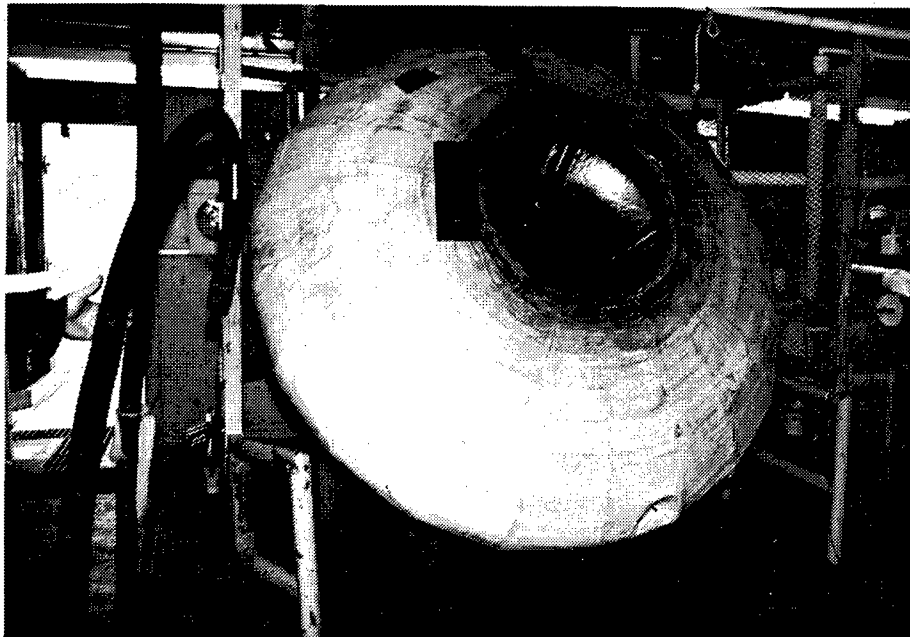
Building 4952-1: Coating barrel manufactured by Camden Copper Works, Camden, New Jersey, located in the Coating House.
